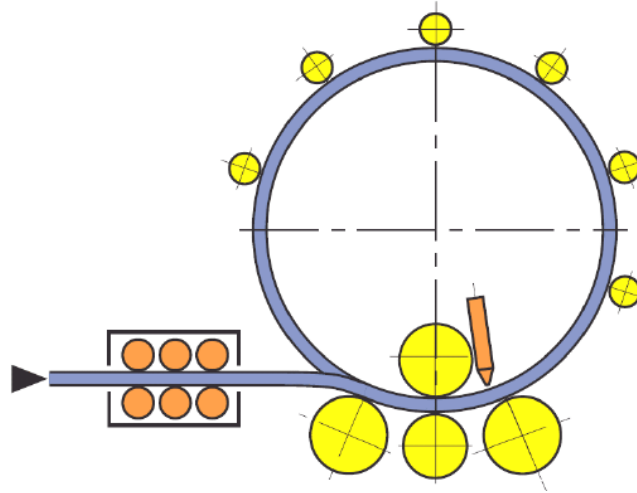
Three-roll bending system with outside roller cage [Franz and Baldur 2004]
